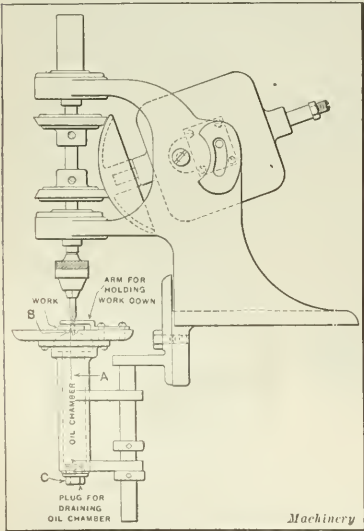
Provision made for Tool Lubrication on Anderson Variable-speed Tapping Machine
